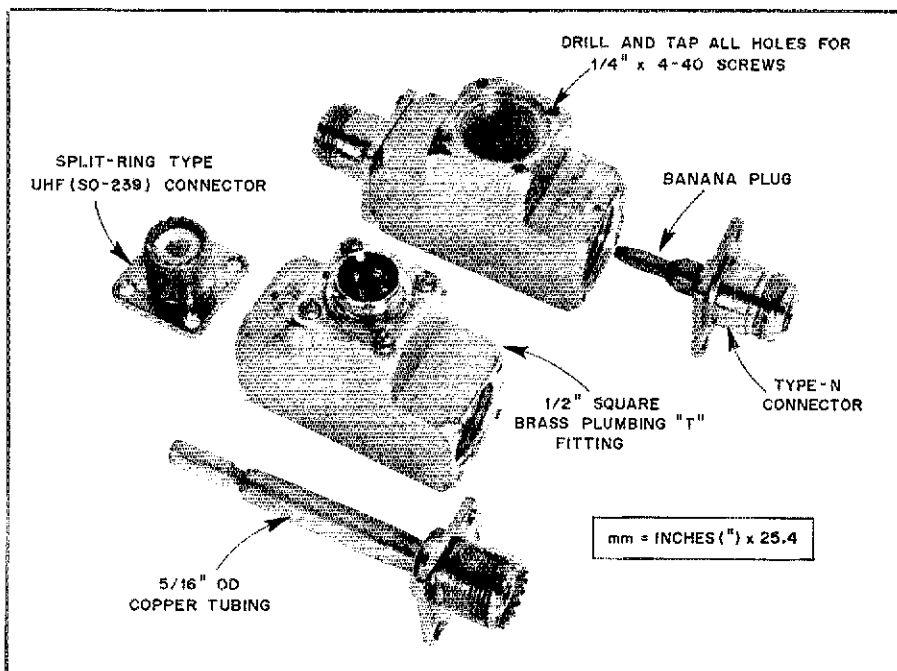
Exploded view of two line samplers, illustrating various construction techniques. The sampler at the top uses type-N coaxial connectors, and a banana plug/jack combination for the center conductor. In the bottom sampler, split-ring uhf (SO-239) connectors are used.
